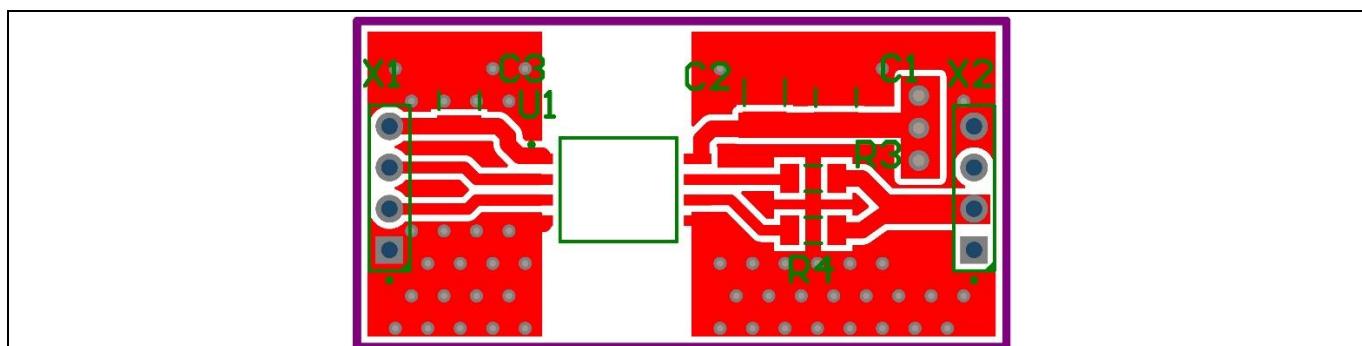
Top view of PCB for CT gate driver design with 1ED3124MC12H (X3 Compact)
